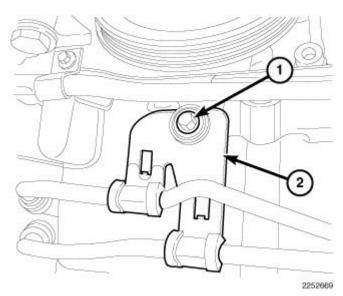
A/C Mounting Bracket Bolts Courtesy of CHRYSLER LLC
